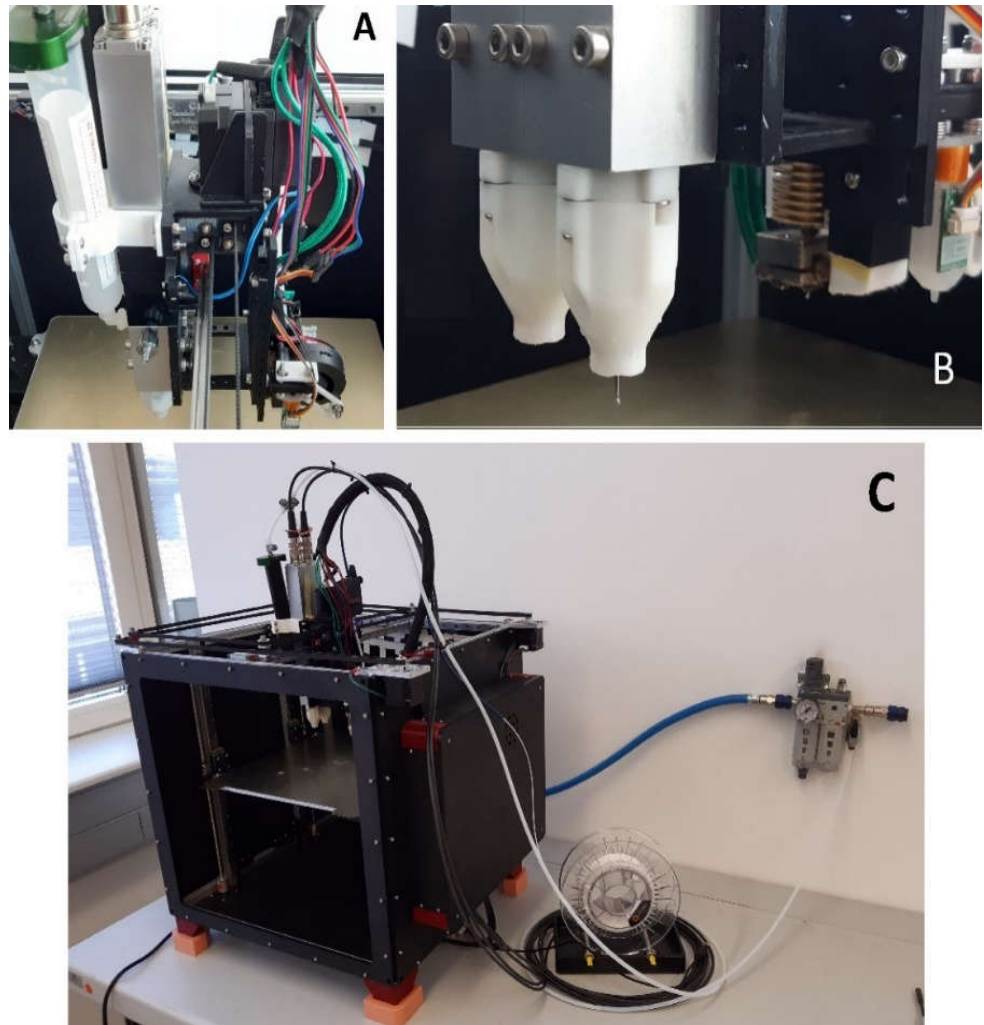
(A) The moving unit of the Railcore II 300 ZL printer, extended with the Viscotec Vipro-HEAD 3/3 fluid extruder; (B) the printing nozzles; (C) the printer frame.
